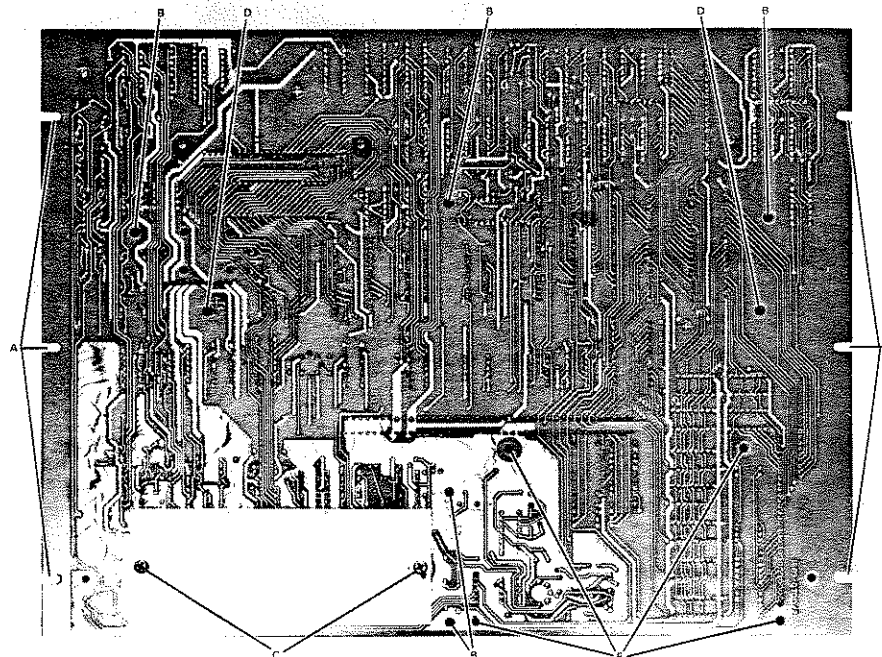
Locations of screws on the main board, bottom view. Screws at A and B hold the board to the chassis. Screws at C hold a shield and (with 2 screws from the other side) the test fixture assembly. Screws at D hold brackets for the display board; and at E, the keyboard module.
